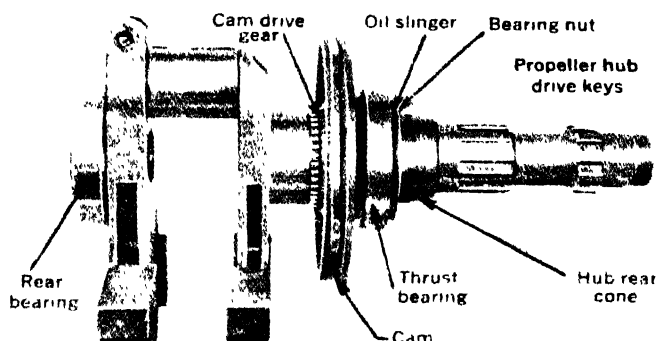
Crankshaft of Wright "Cyclone" Engine Assembled with Associated Parts.
